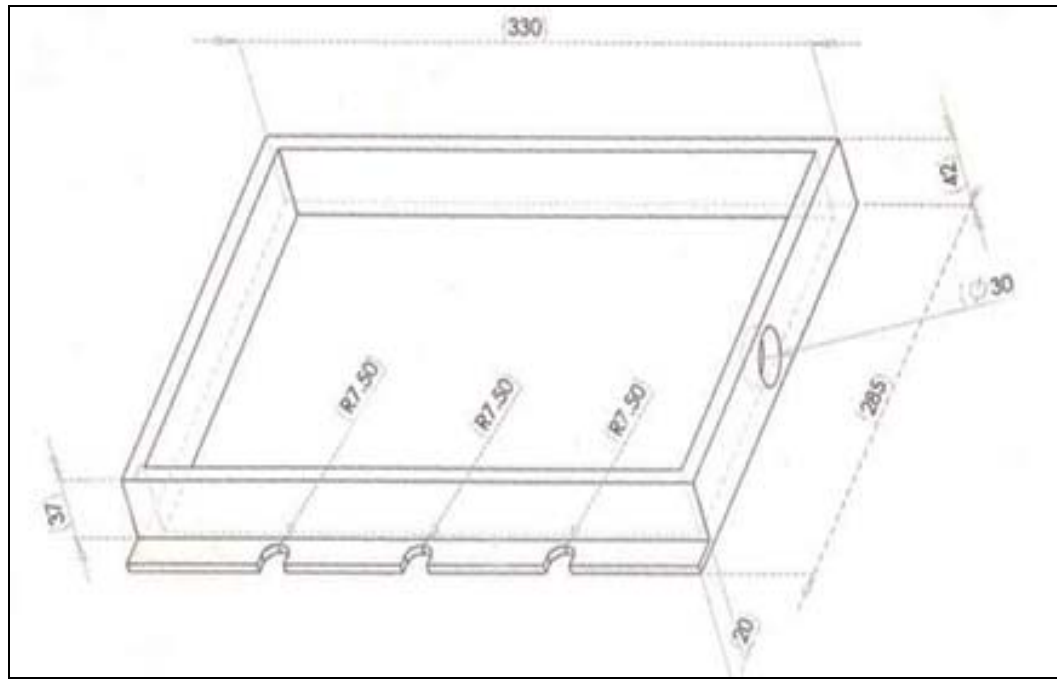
SolidWorks® drawing of a burst tray insert: isometric view.
